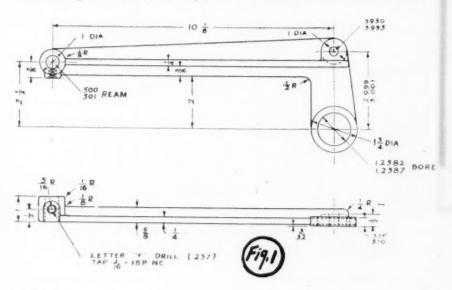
shows a part, made of Aluminum Alloy, of one of the machine tools built by the George Gorton Machine Co. The first machining operation, when producing this detail, is milling the lower faces of the two bosses shown at the right hand of the drawing.
